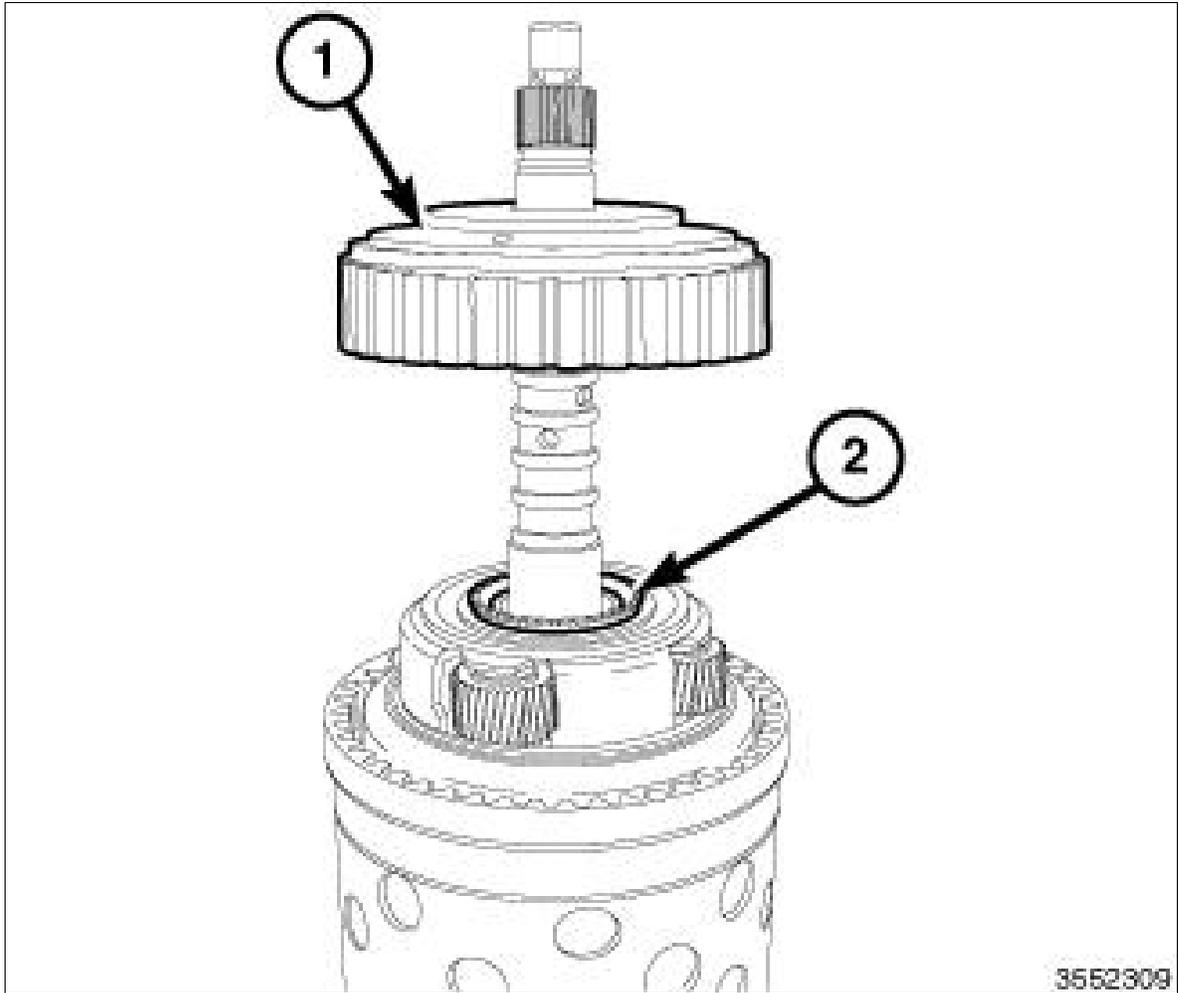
P4 Annulus Drum Assembly, Press Fixture Assembly & Bearing/Gear Splitter
